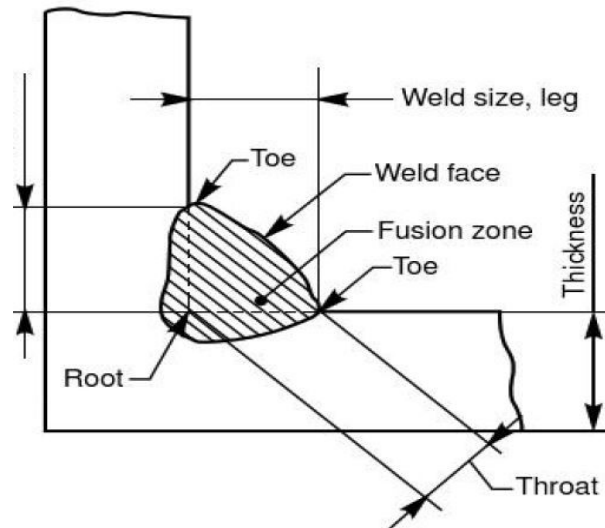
Fillet weld (Narayan, 2006, 161)
